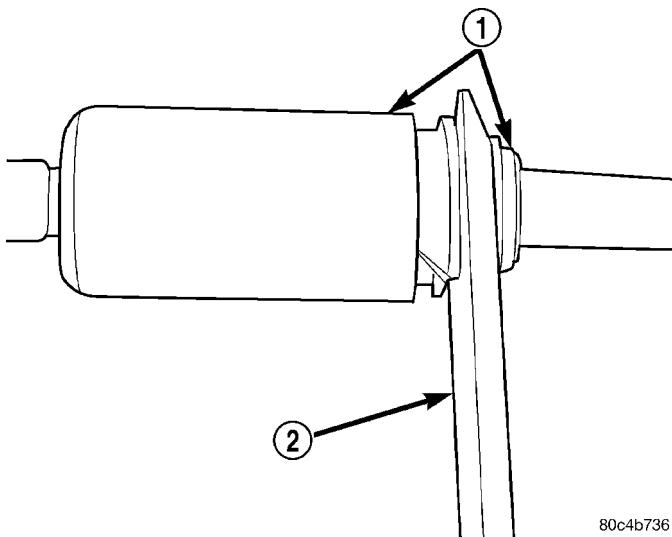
Disconnect Quick-Connect Using Tool 6638A
